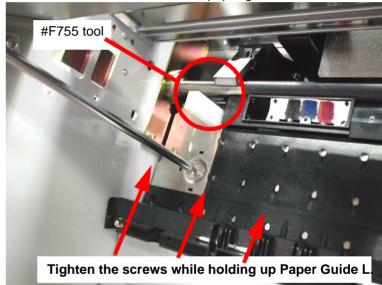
Adjusting the Paper Guide L Assembly Position (1/2)
